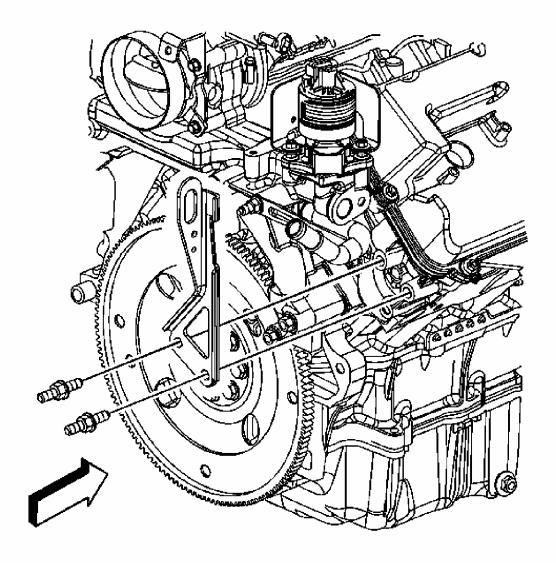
Identifying Engine Lift Bracket Studs Courtesy of GENERAL MOTORS CORP.
